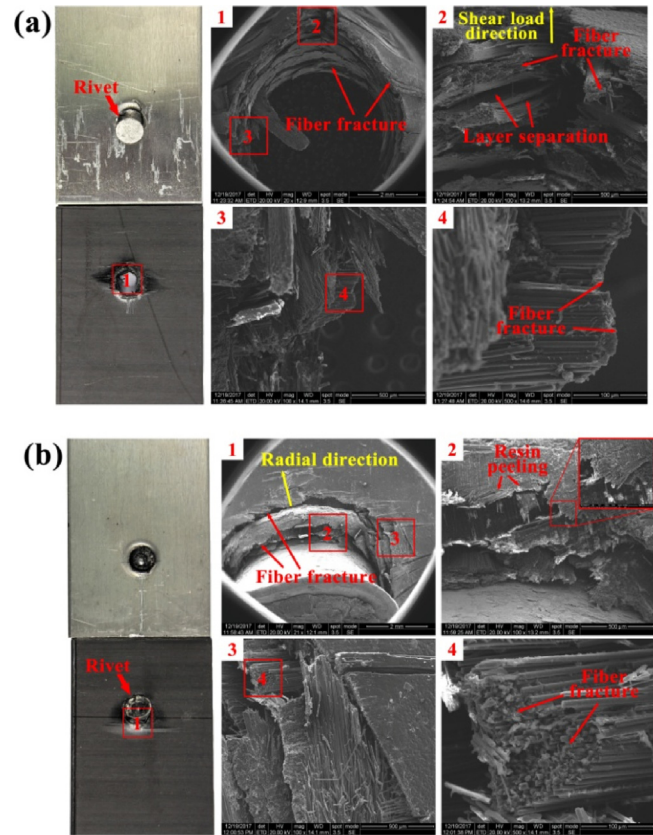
The shear failure appearance of lap joints: (a) the E-SPR joint and (b) the P-SPR joint.
